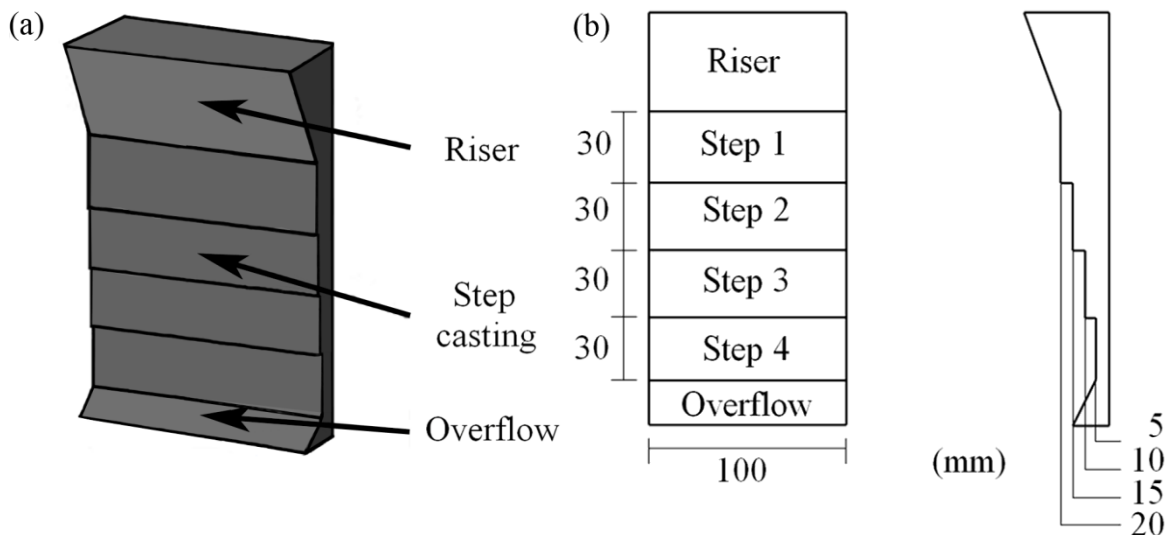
a) The step casting CAD geometry with b) front and side views.
